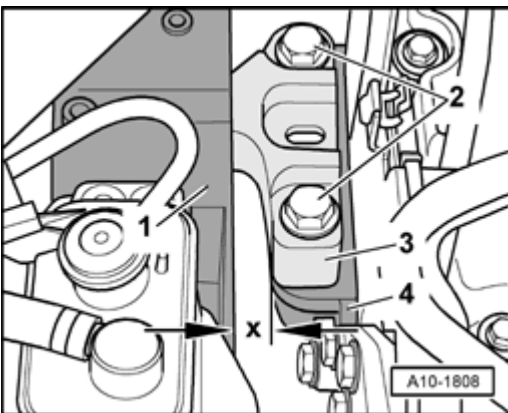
Checking Dimensions At Engine/Transmission Assembly Mounting
